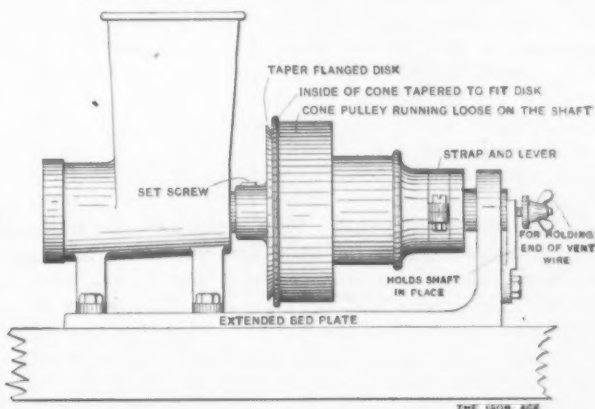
A Wadsworth Core Machine Arranged for Power Drive.
